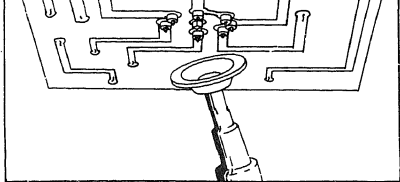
Special soldering iron adaptations-bar-type tiplet and wire brush methods.
